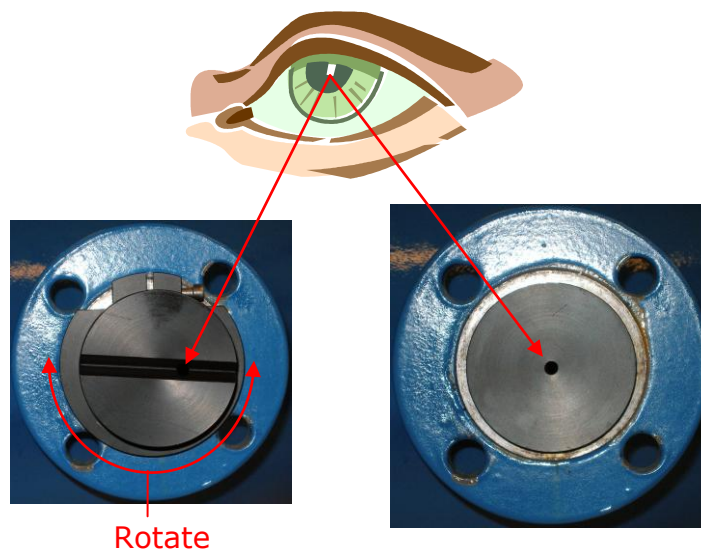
Look through the holes on the sighting tool. Rotate the sighting tool on the left to get a correct alignment.
